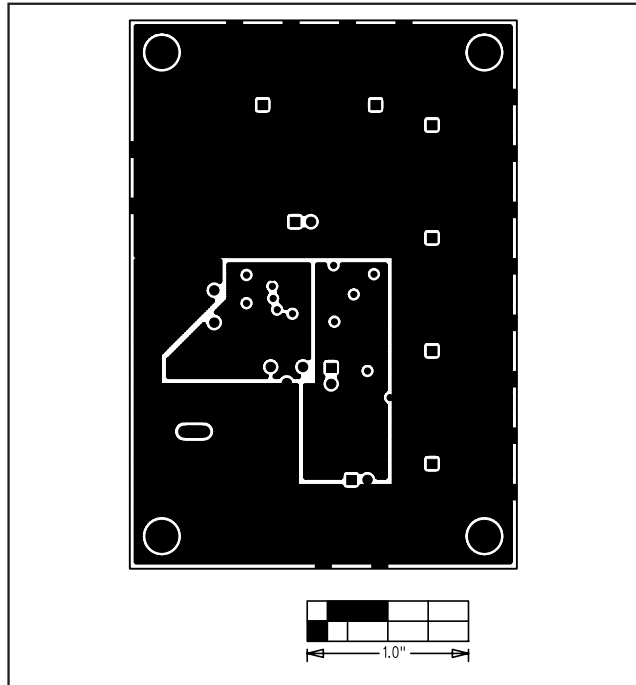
MAX9486 EV Kit PC Board Layout—Solder Side
